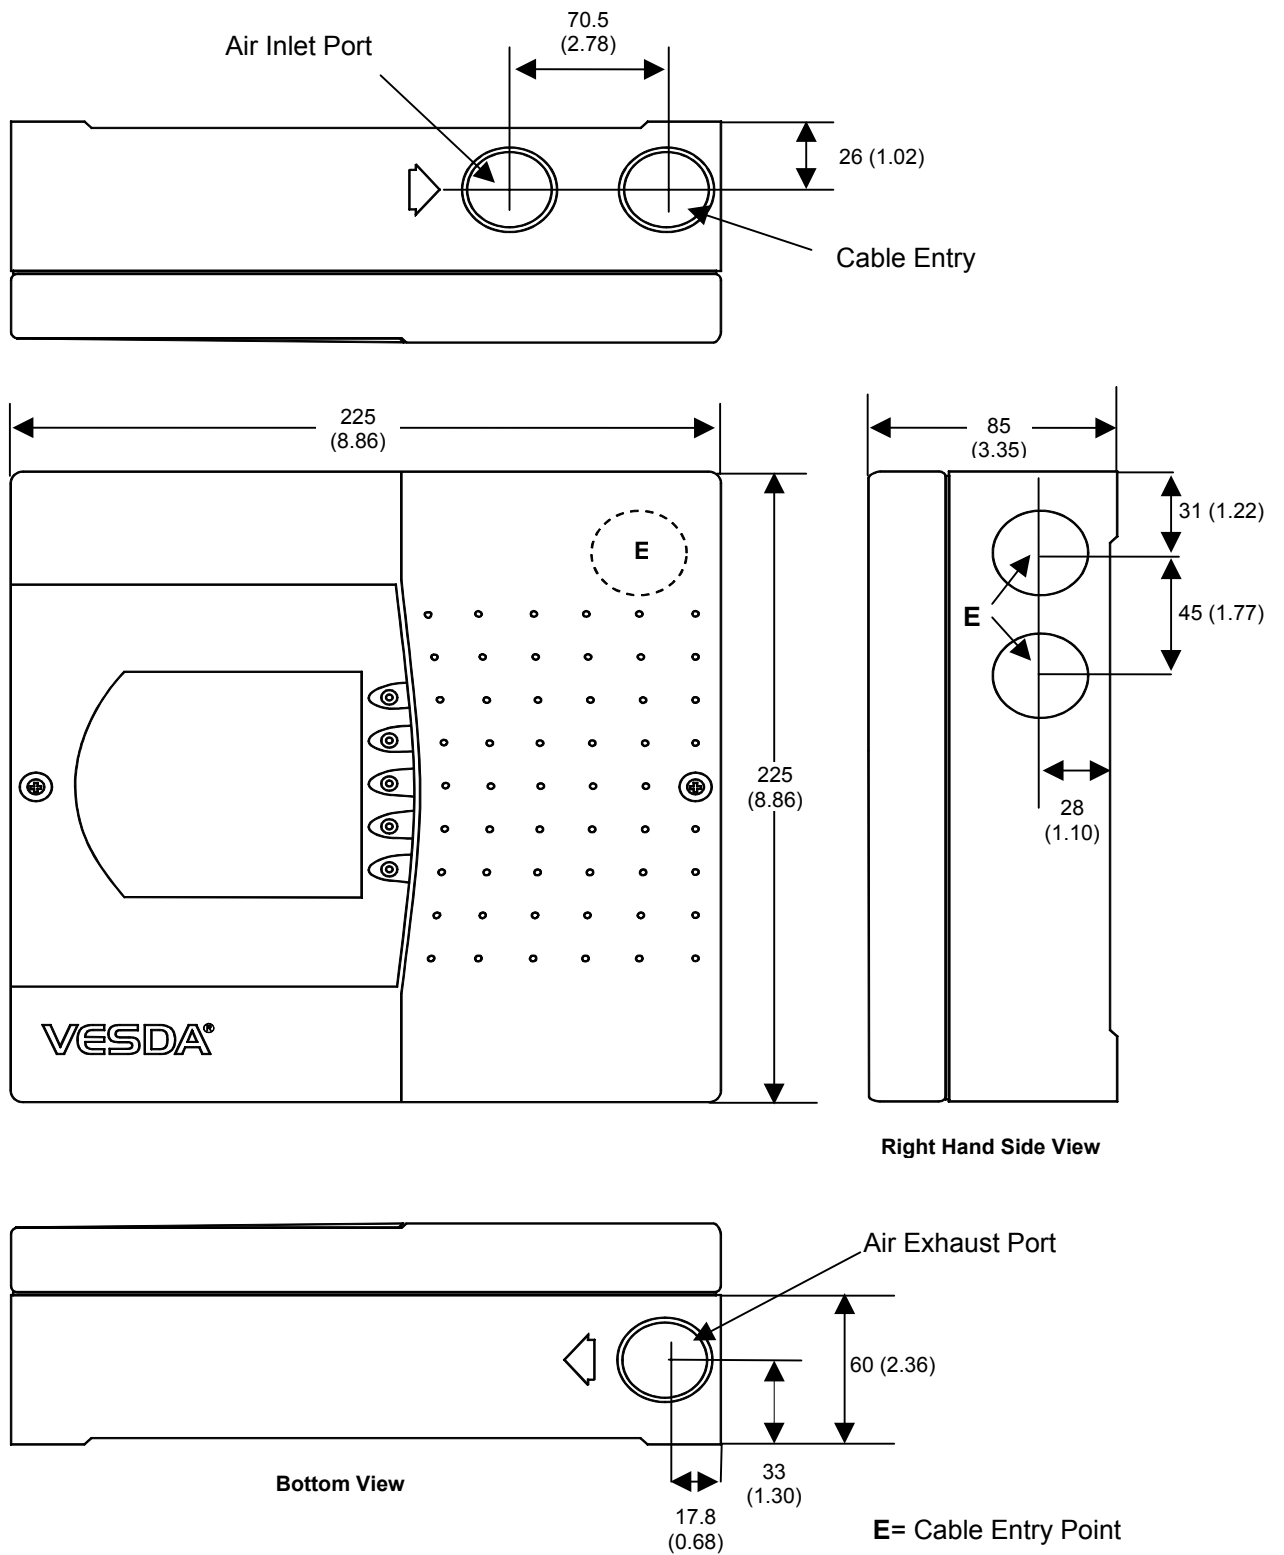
Dimensions in mm (inches) for the LaserCOMPACT
